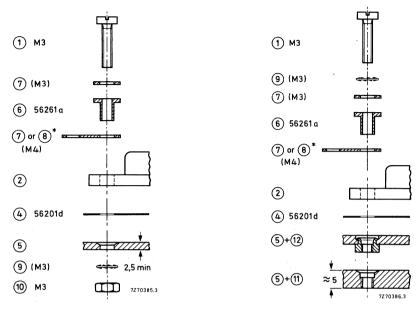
Insulated mounting Fig. 10 Insulated mounting (500 V) (500 V) with nuts. with tapped holes or insert nuts.
